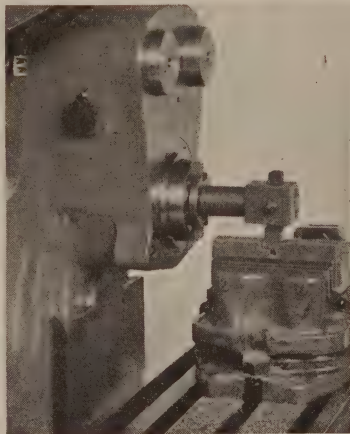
Using a fly cutter. Set the spindle speed for the diameter of the *swing* of the cutter. Use fine feed.
